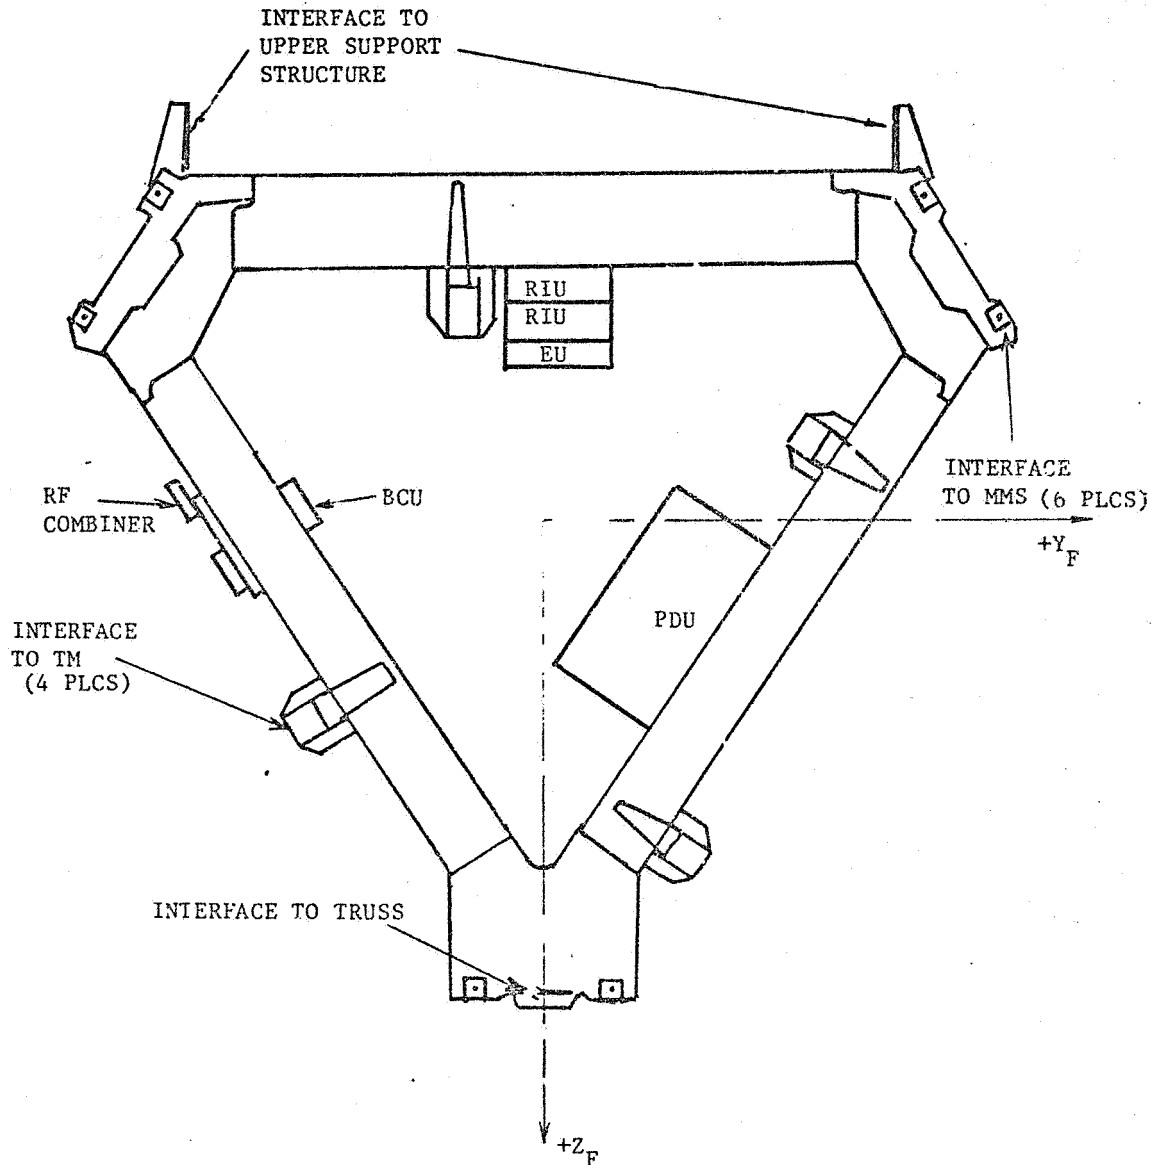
Component Packaging and Attachment Points, Mission Adapter
